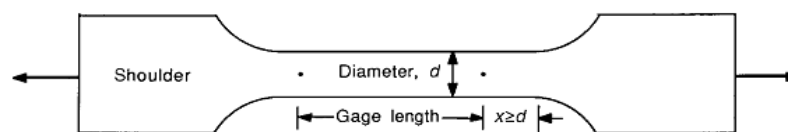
Typical tensile specimen geometry, showing a reduced gage section and enlarged shoulders [16].
